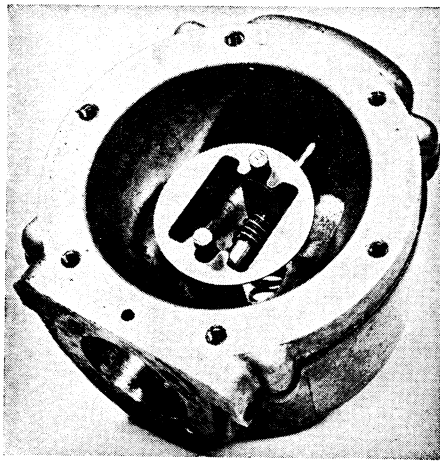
Showing how flat washer rests on pins in lower body section after diaphragm is in position
